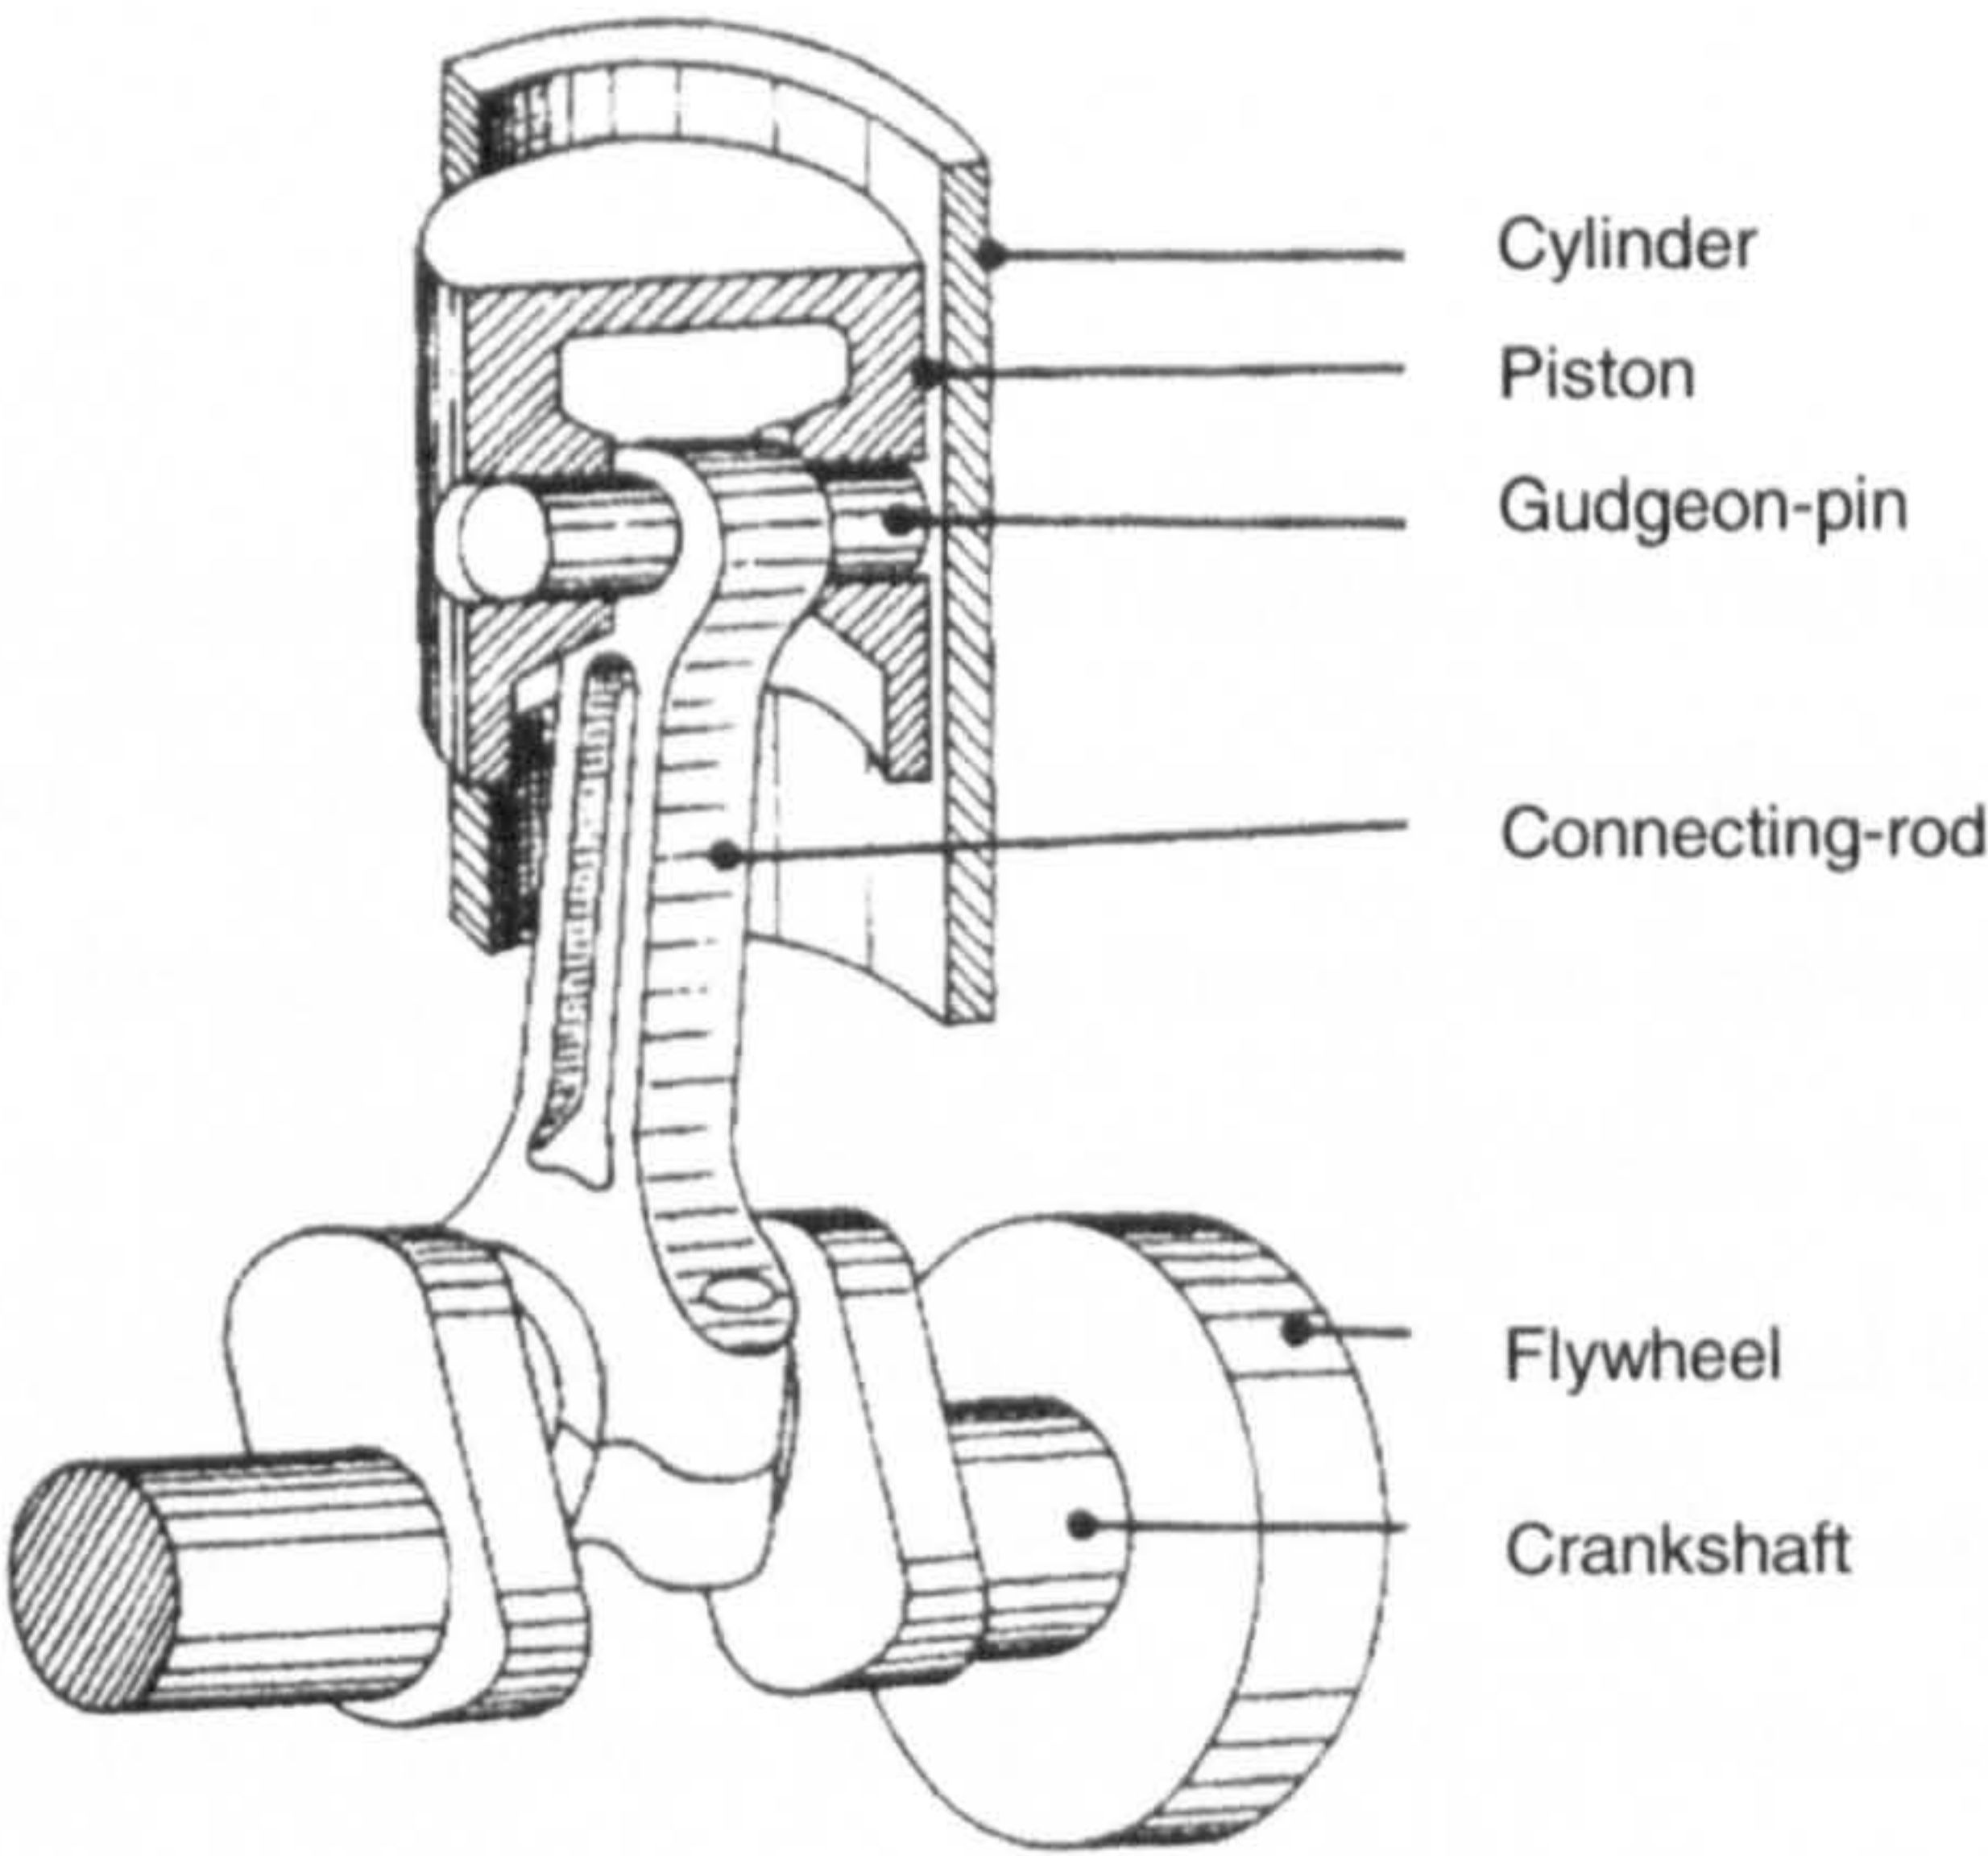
Schematic diagram of a piston assembly, after Heisler ^[Hei99]
